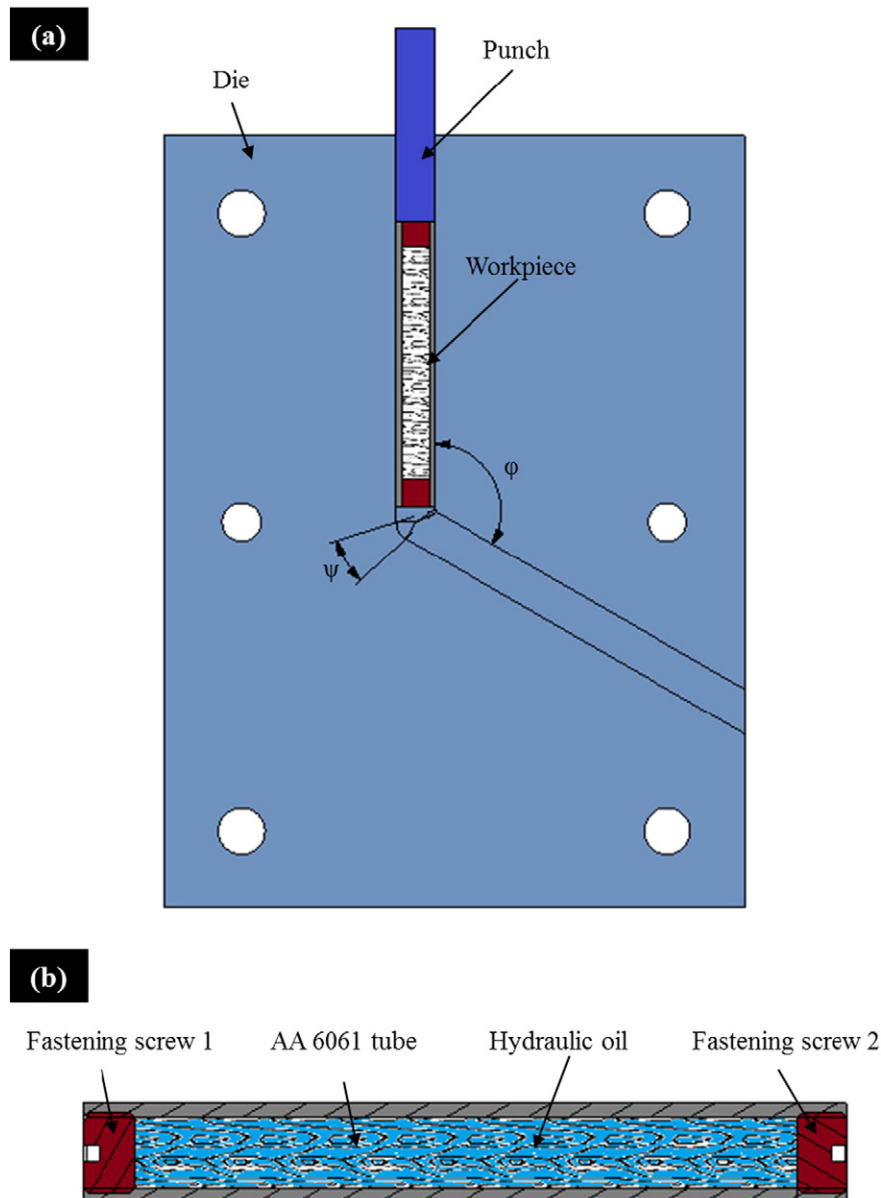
Schematic illustration of (a) the tube-ECAP principle and (b) the assembly of the initial workpiece.
